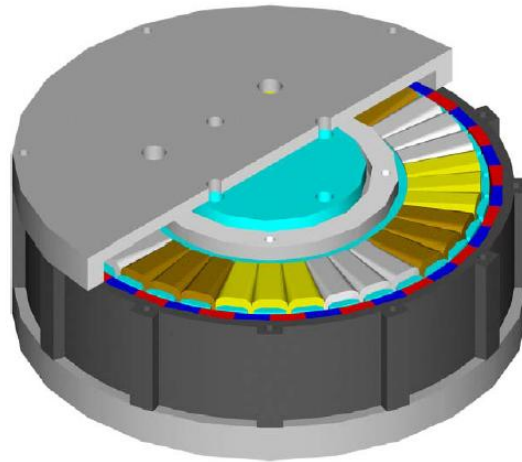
54-slot/60-pole external rotor surface-mounted PM machine.
